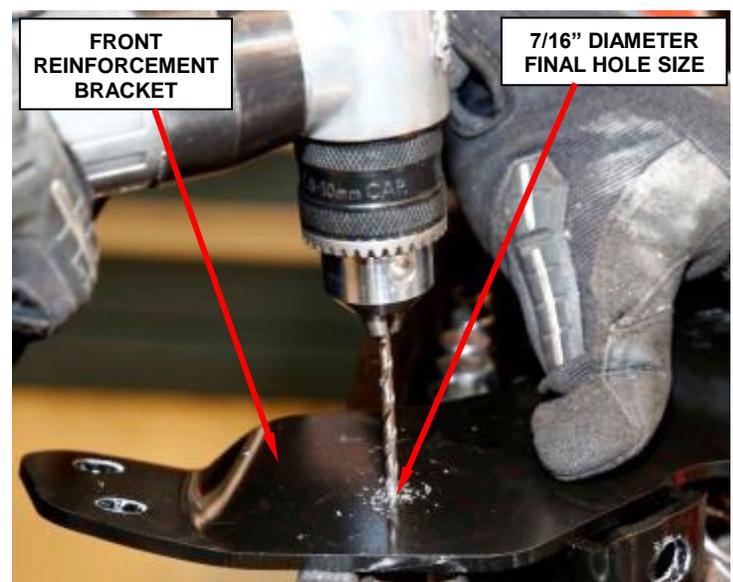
Drill One Hole In Front Reinforcement Bracket to 7/16"
